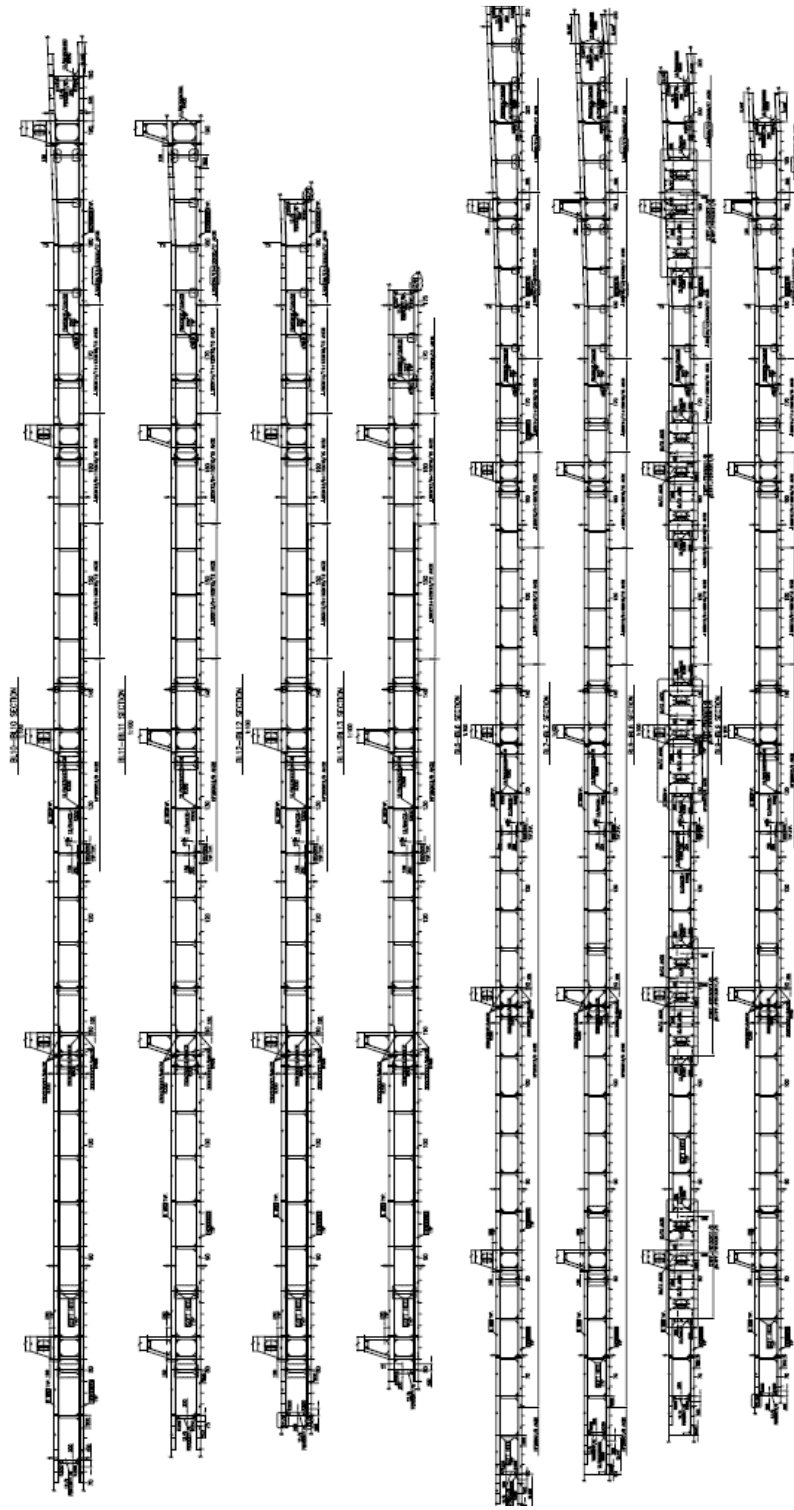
(a) – Double bottom construction in several buttocks, profile view
